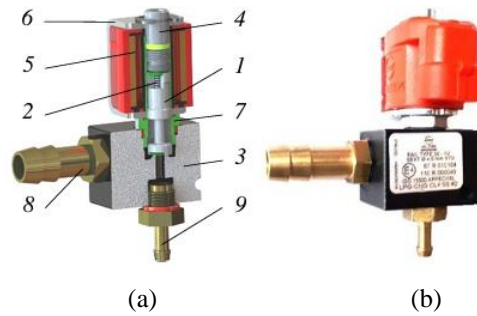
Structure of the Valtek gas injector [8]: a - model injector, b - actual injector, 1 - piston, 2 - spring, 3 - body, 4 - restrictor, 5 - coil, 6 - solenoid circuit, 7 - channel, 8 - inlet nozzle, 9 - outlet nozzle
